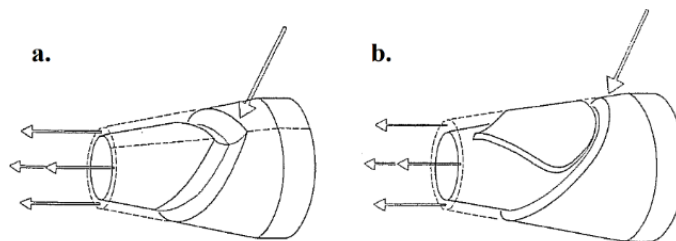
Mandrel of side fed die with, (a. coathanger manifold, b. heart shape manifold)
